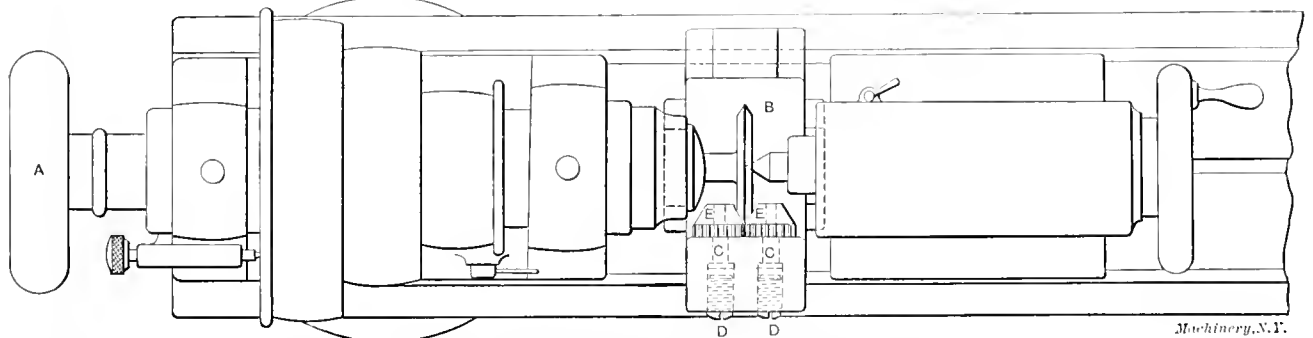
Bench Lathe with Fixture for Charging Diamond Lap.
